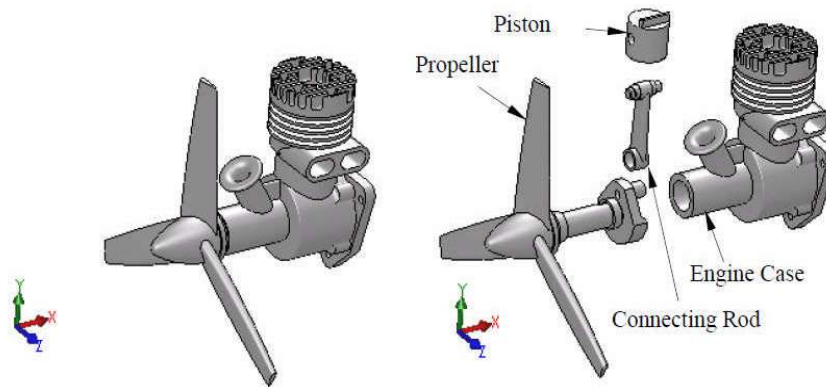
Single-piston engine: (a) Unexploded view, and (b) Exploded view.
